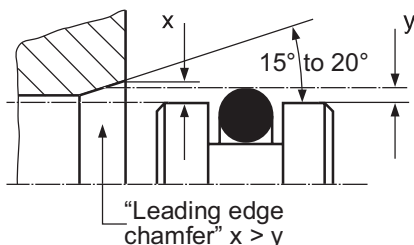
The diagram shows the leading edge chamfer and an O-ring before deformation. The dimension X should be greater than dimension Y to ensure a trouble-free assembly operation
